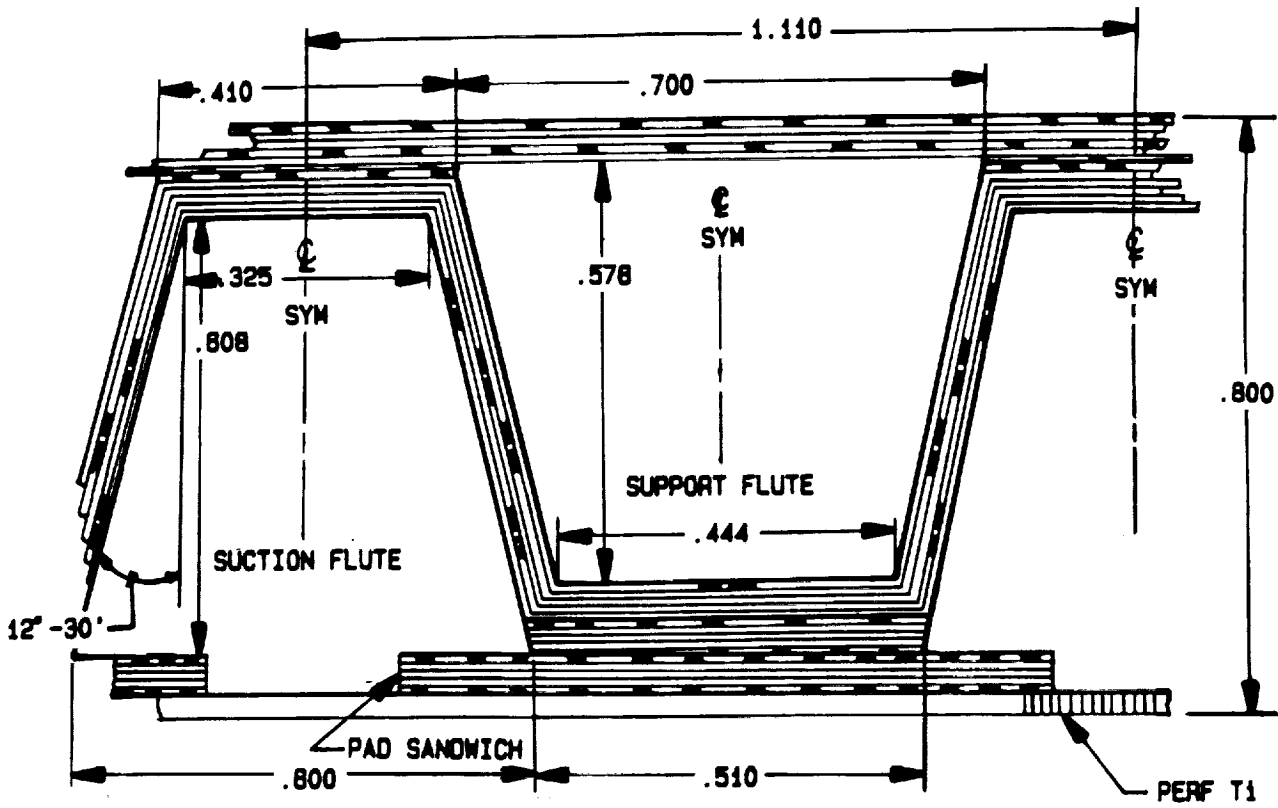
PANEL LA1-7, CROSS-SECTION DETAILS
